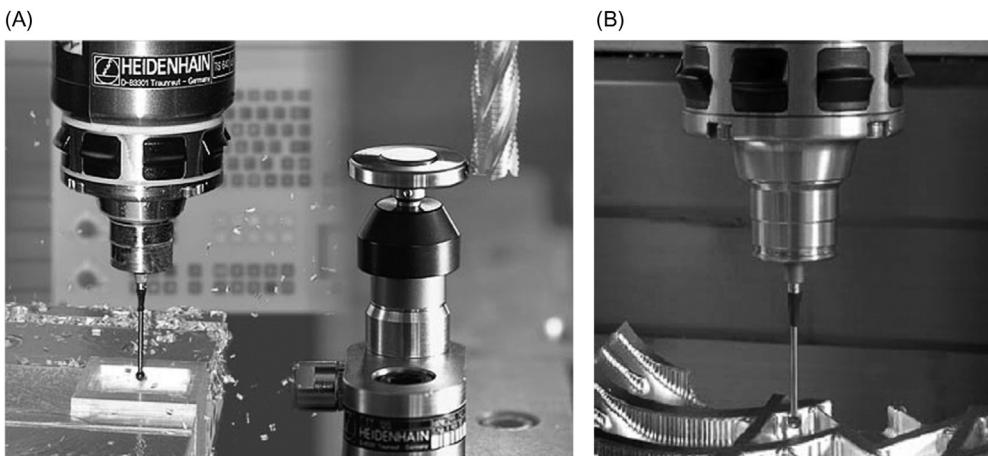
Examples of on-machine probing for tool and part measurements: (A) Measuring workpiece between machining cycles and tool presetting. (B) Part inspection [25].
